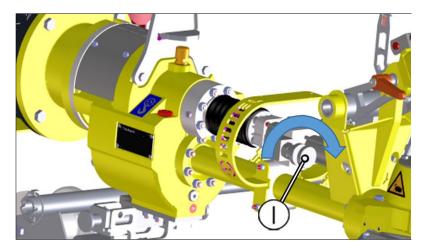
Adjusting screw for setting the torque (pressure control valve)
